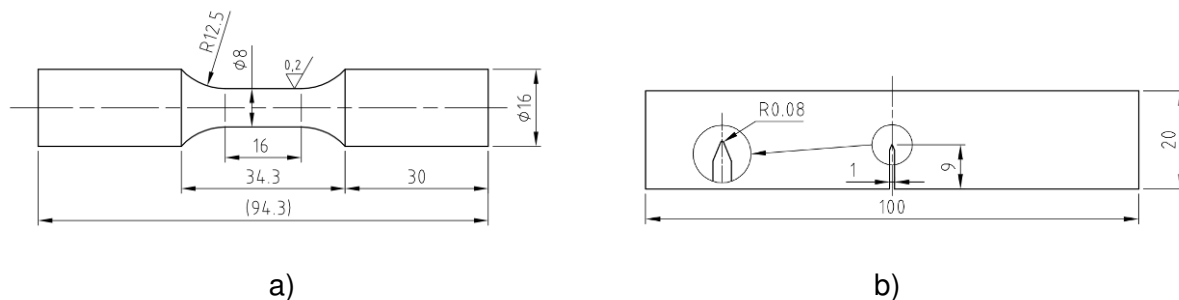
Shape and dimensions of specimens: a) cylindrical specimen for cyclic testing, b) SENB specimen for three-point bending testing
